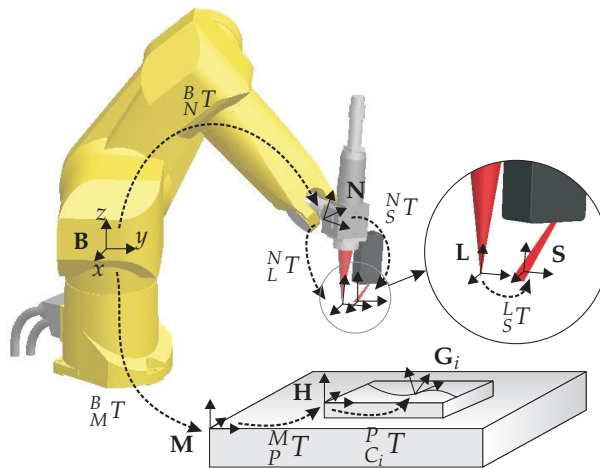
Frames and transformations for sensor-guided robotic laser welding
